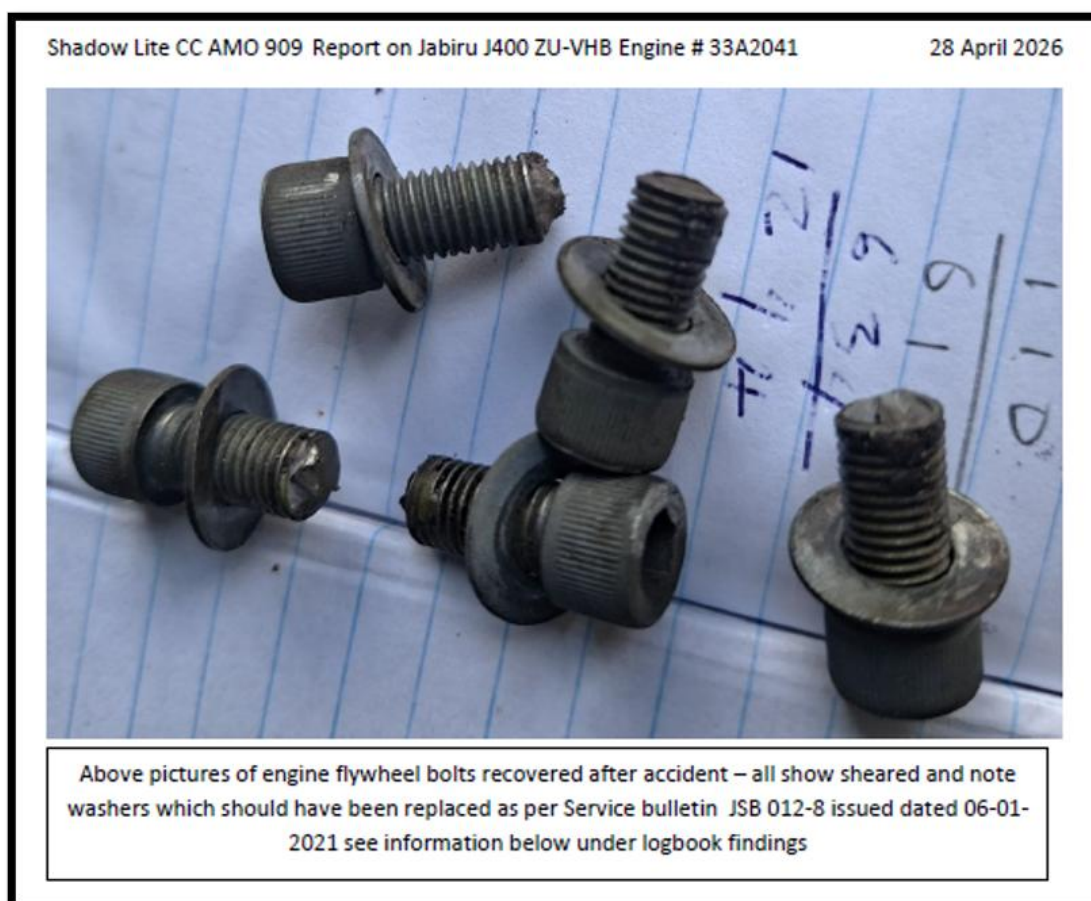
The sheared flywheel screws that were removed; the sixth screw was stuck to the engine.
